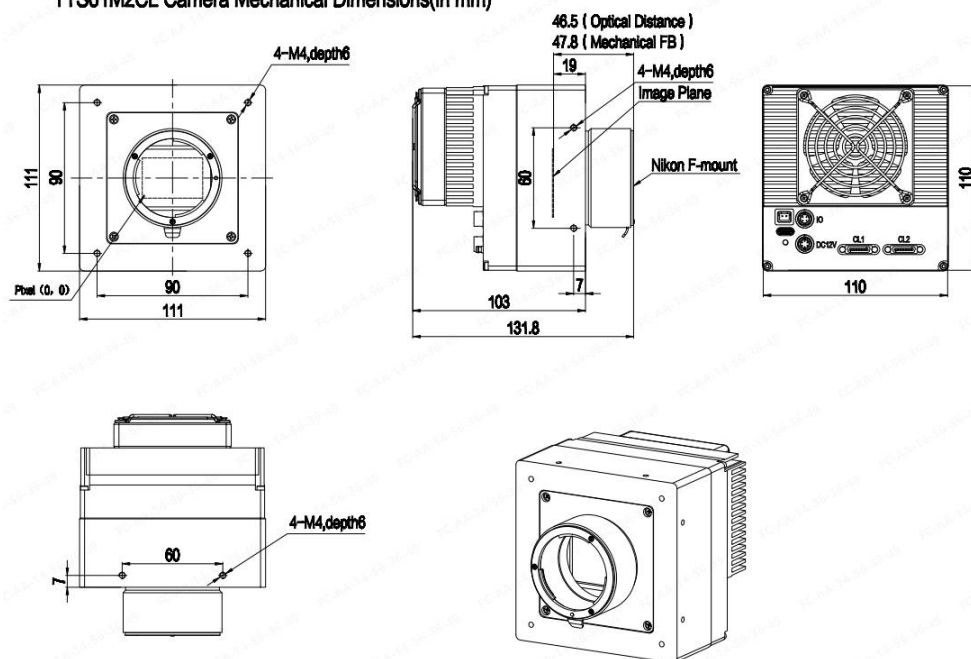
TTS61M(2)CL Camera Mechanical Dimensions
